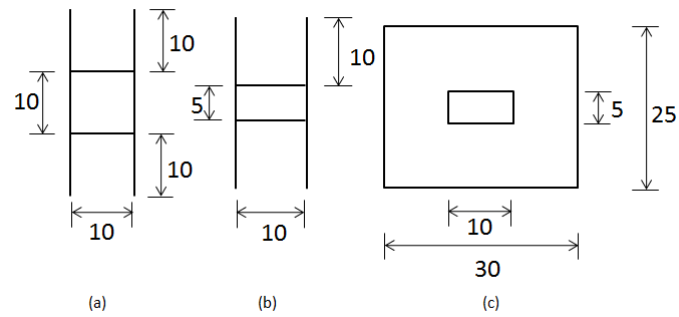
Bobbin Dimensions. (a) Front view, (b) Side view and (c) Top view. All dimensions in mm
